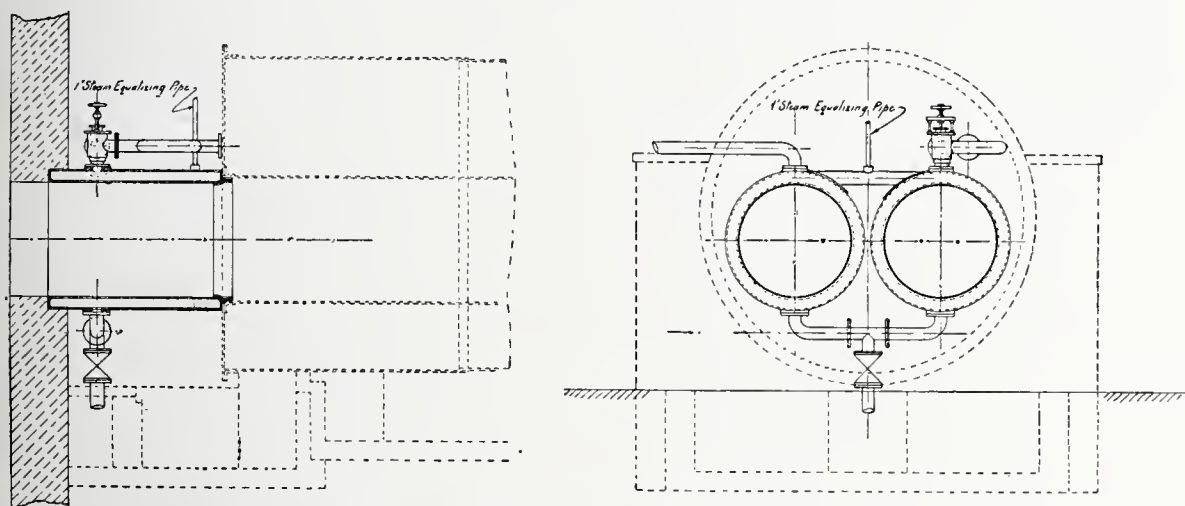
Water-jacketed Connector between Combustion Chamber and Fire Tube of Boiler.
